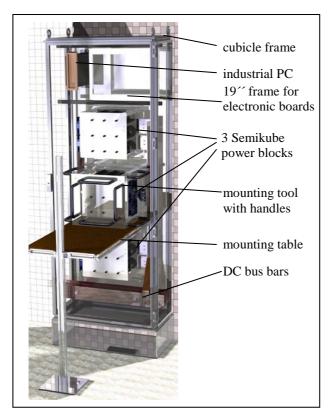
Drawing of the inverter cubicle with mounting tool and mounting table
